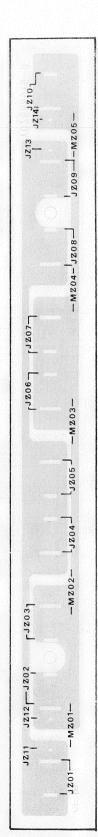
Dial Lamp Assembly (PZ01) Component Location
